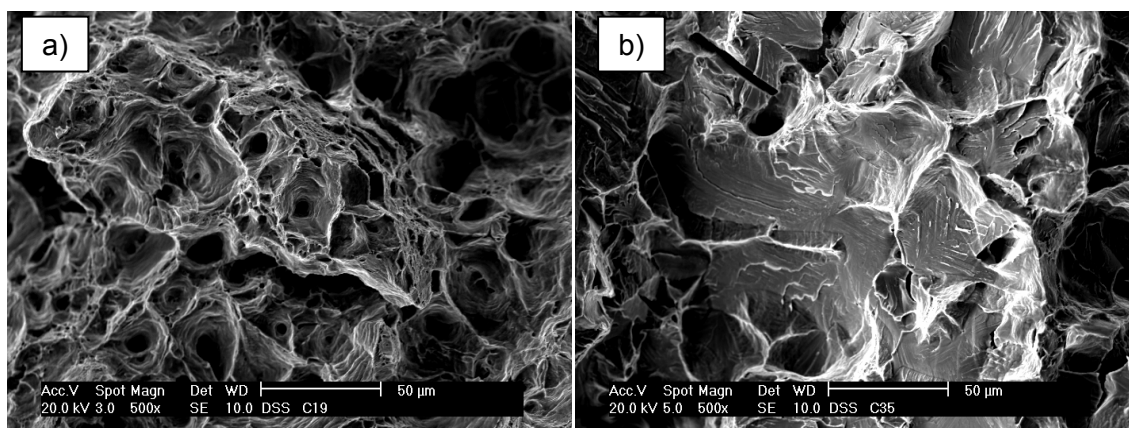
Fracture surfaces of (a) non-embrittled and (b) embrittled specimens having seen 20,000 fatigue cycles
